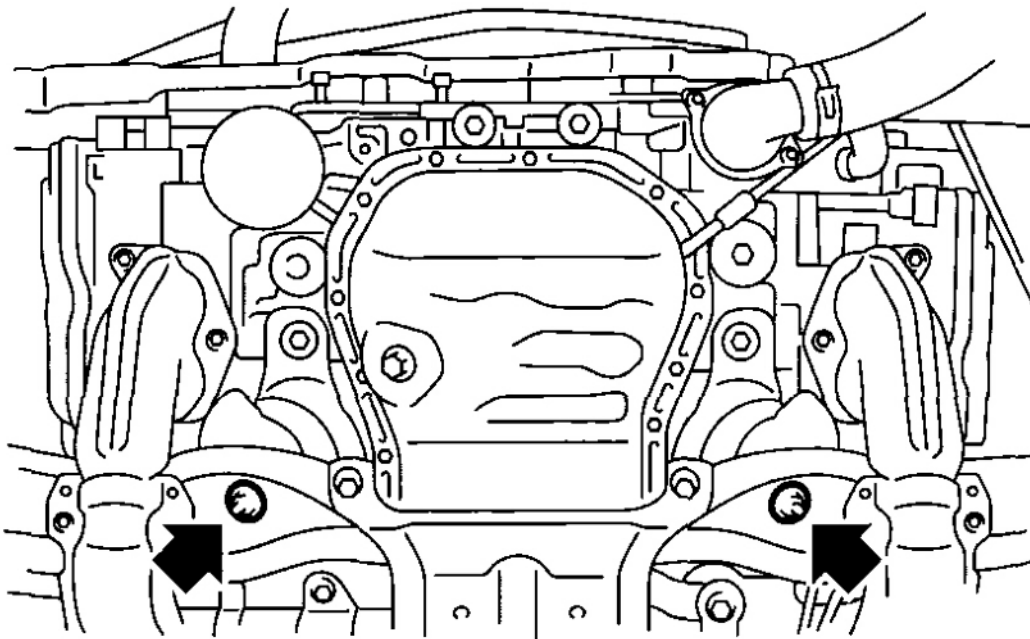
Tightening Bolts Which Hold Lower Side Of Transmission To Engine
